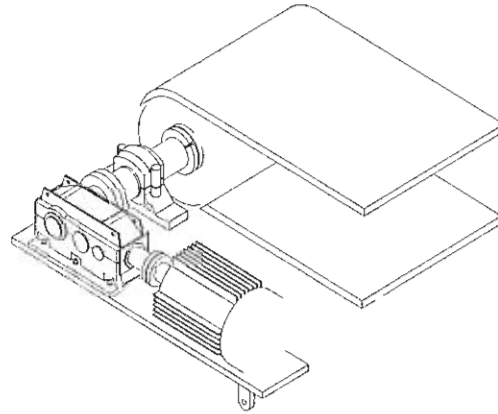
Representation of a typical right angle, shaft-mount reducer assembly rigidly coupled to a pulley shaft
